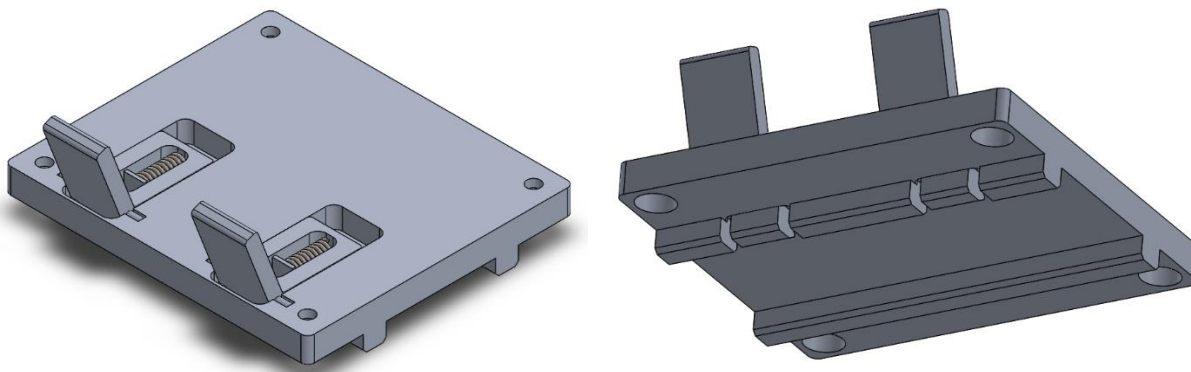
Quick-mounting plate with the quick clip mechanism (a) top view (b) bottom view
